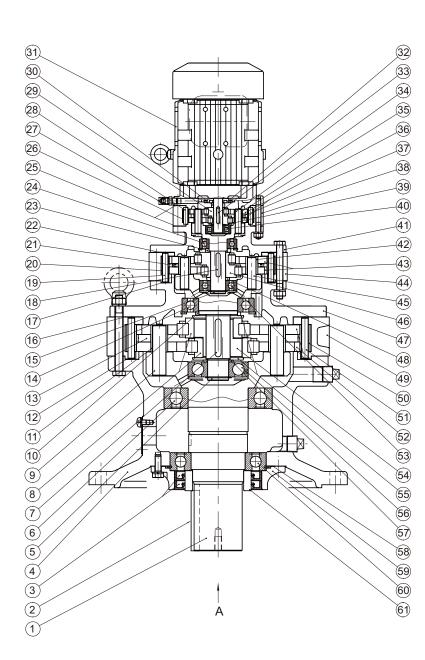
Type CVVM (Vertical, Gearmotor), 3 Stage Reduction (Example: Frame size 6185TD)
